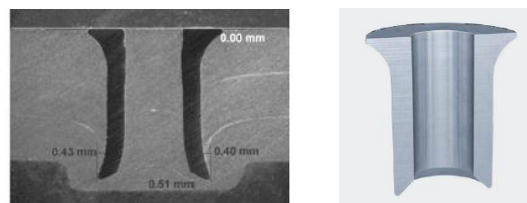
, Fully tubular rivet for thick stack aluminium joints, known as the T-rivet
